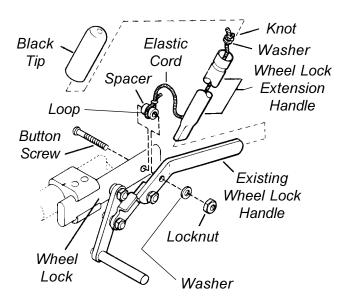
WHEEL LOCK EXTENSION HANDLE INSTALLATION
